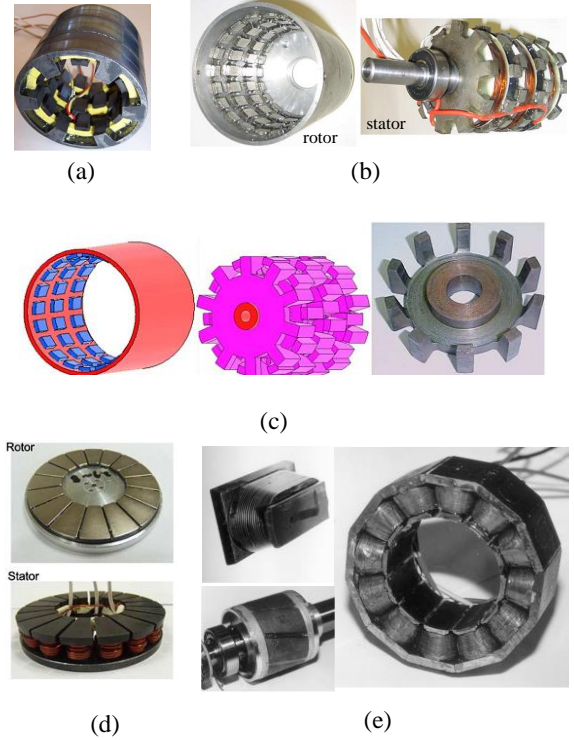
Photos of motors, (a) motor A: inner rotor claw pole motor with low density mold [3], (b) motor B: outer rotor transverse flux motor [1], (c) motor C: outer rotor claw pole motor [15], (d) motor D: axial flux generator [16], and motor E: radial flux motor [17].
